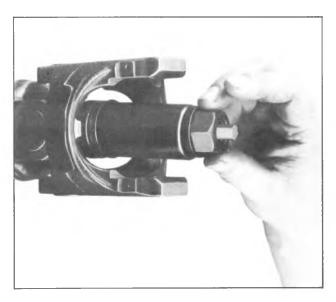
A-29--Installing Outer Cylinder of Tool J-23996 Over Ball
